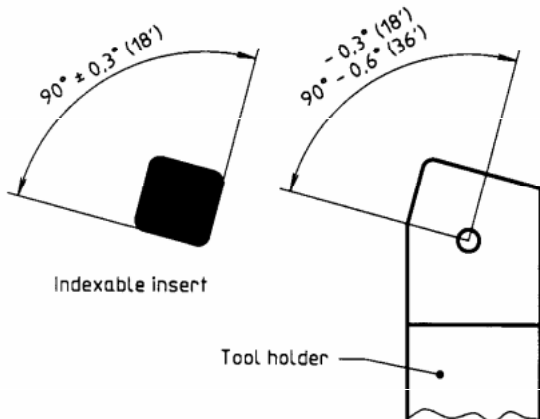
Tolerances on squareness of insert and tool holder location
